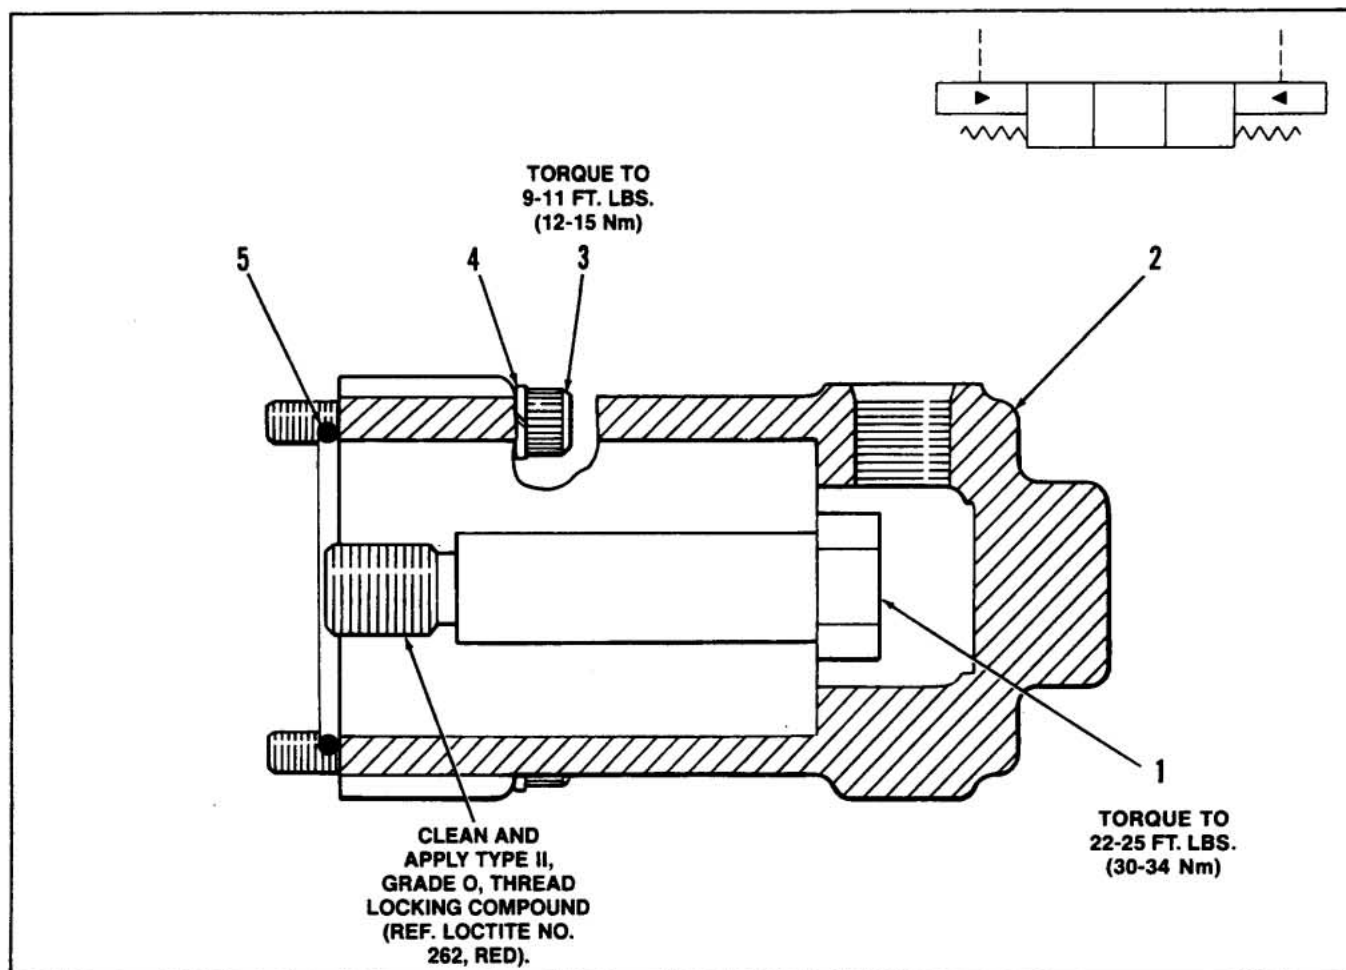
Hydraulic Remote Positioner ("A" Port End).
